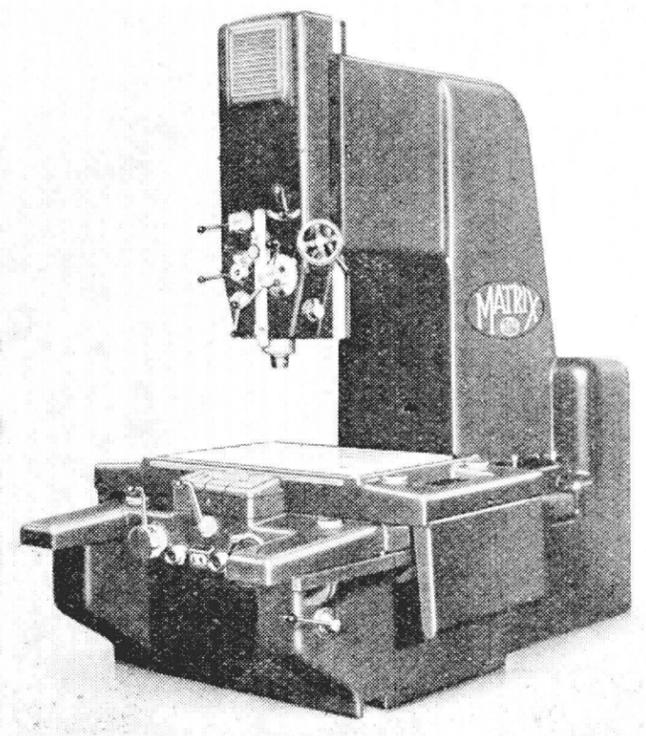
The Coventry Gauge and Tool Matrix No. 50 optical jig borer
